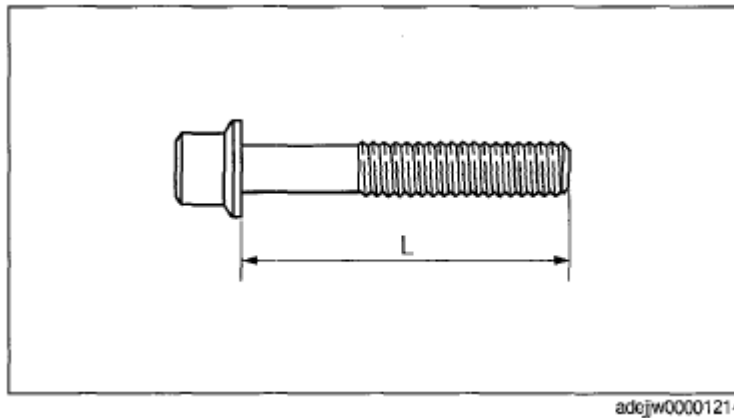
Identifying Tensioner Arm, Tensioner And Bolt
